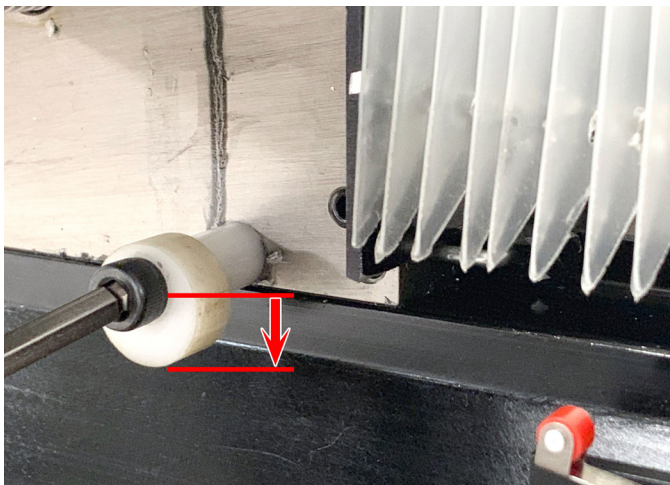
Mount the assembly with the wide side of the eccentric trigger facing down.
